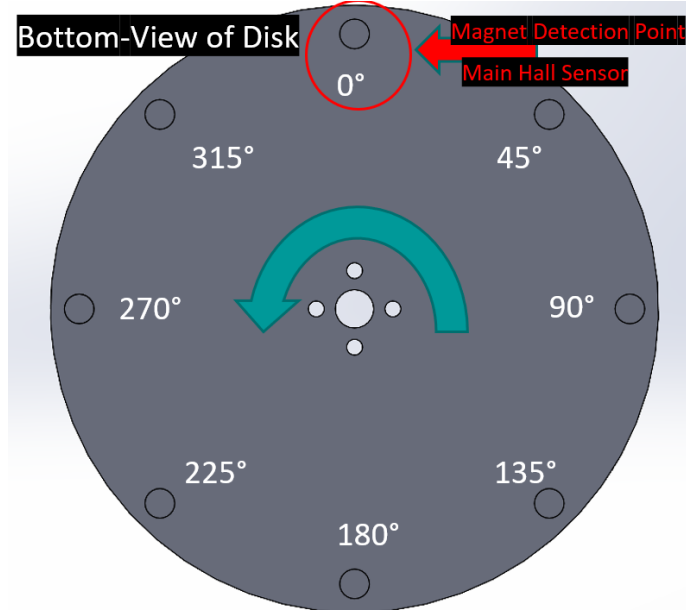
Bottom view of the rotating crank disk showing the angular positions of the eight magnets used for crank-angle detection at 45° increments. Because the disk is viewed from below, the angular positions appear reversed relative to the top-view crank-angle convention used in the analysis. The disk rotates clockwise when viewed from above but appears counterclockwise from the underside perspective shown here. The primary Hall-effect sensor detects each magnet as it passes, including the magnet defining the 0° reference position, providing discrete timing markers for determining instantaneous slider velocity at known crank angles.
